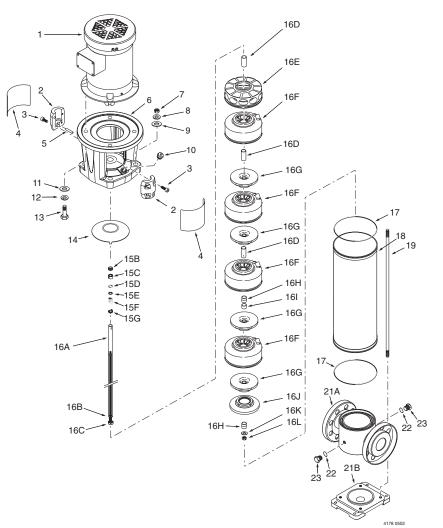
Exploded View PVMI/X2 and PVMI/X4
